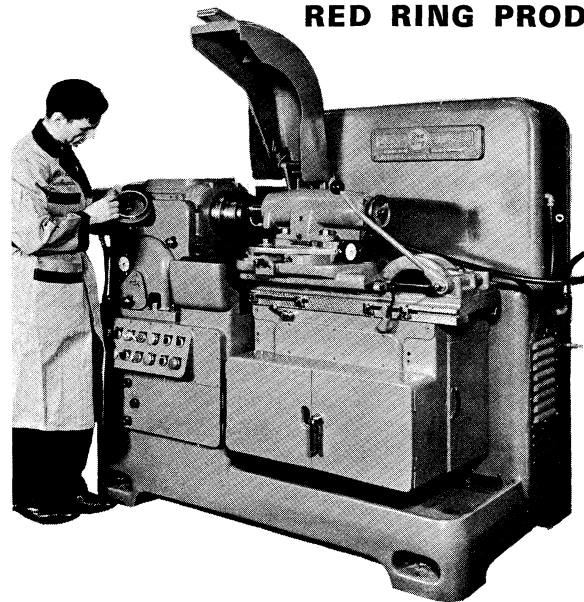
The Red Ring Model GCR internal gear shaver.
